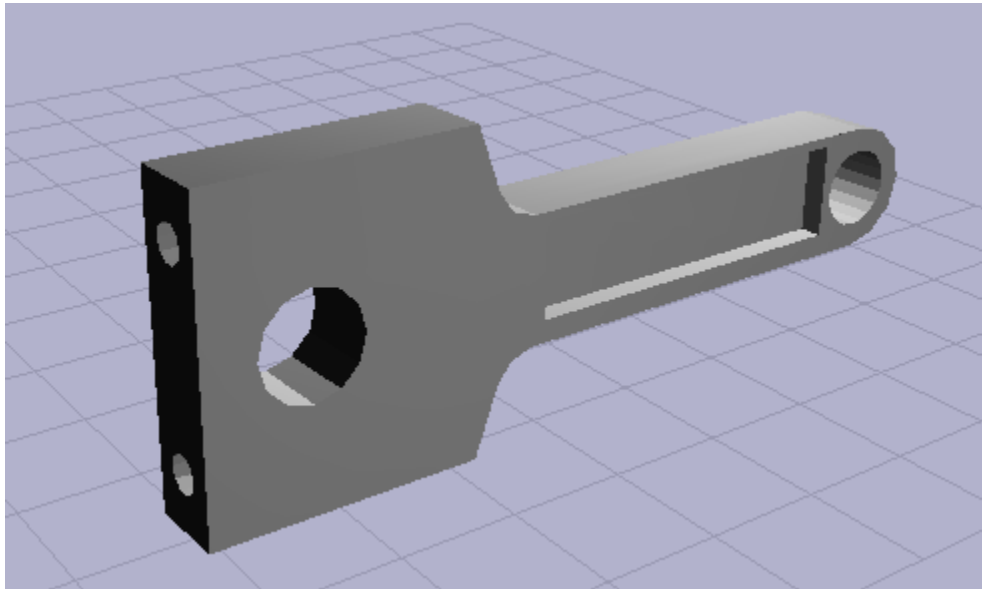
Design Concept 1 – Connecting Rod Utilizing an I-Beam Style Cross-Section
